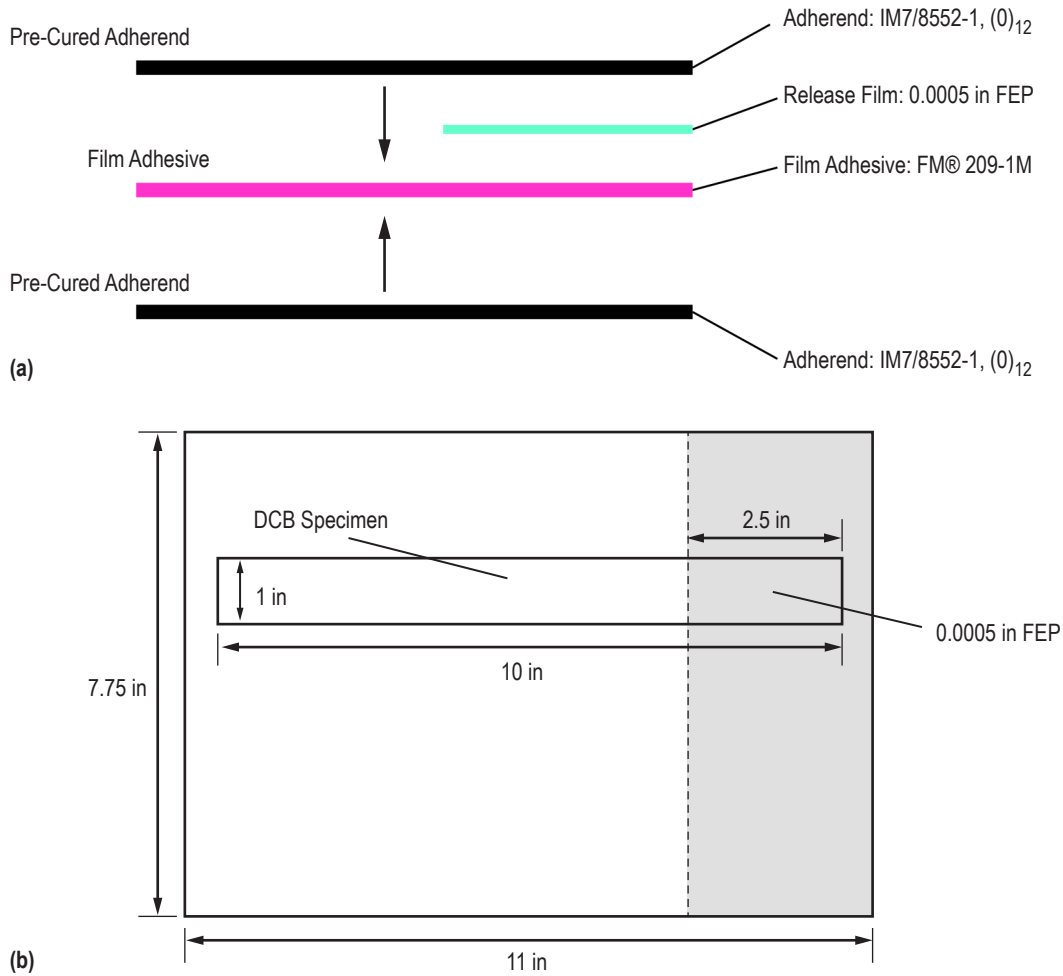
Overview of bonded assemblies fabricated to yield DCB test specimens: (a) bonded assembly schematic and (b) plan view of bonded assembly.
